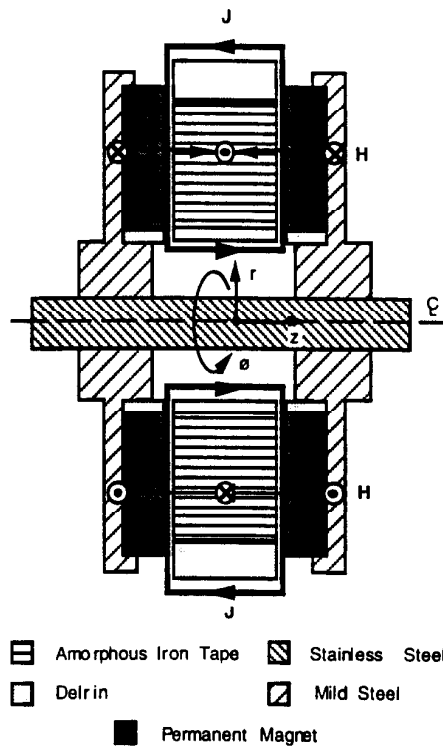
Axial flux toroidal PM machine (AFT PM or "Torus" machine)
